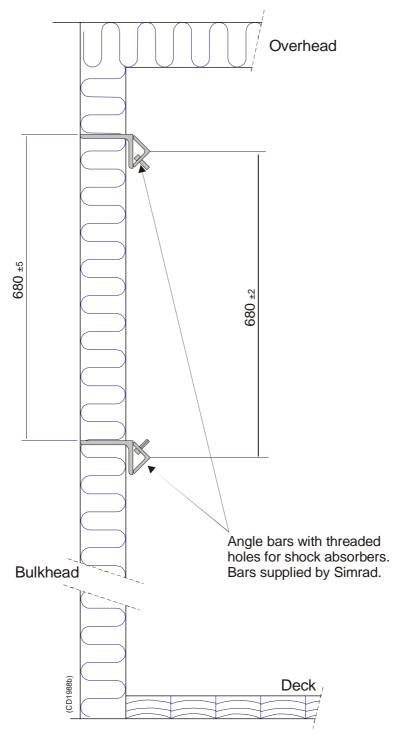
Mounting the brackets for the Transceiver Unit - Side view
